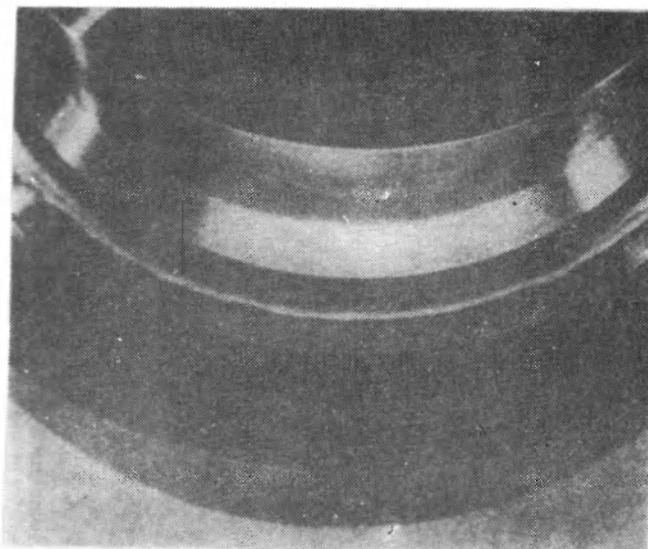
Close-up view of laser welded chandelles to the sommier plates of the reactor
